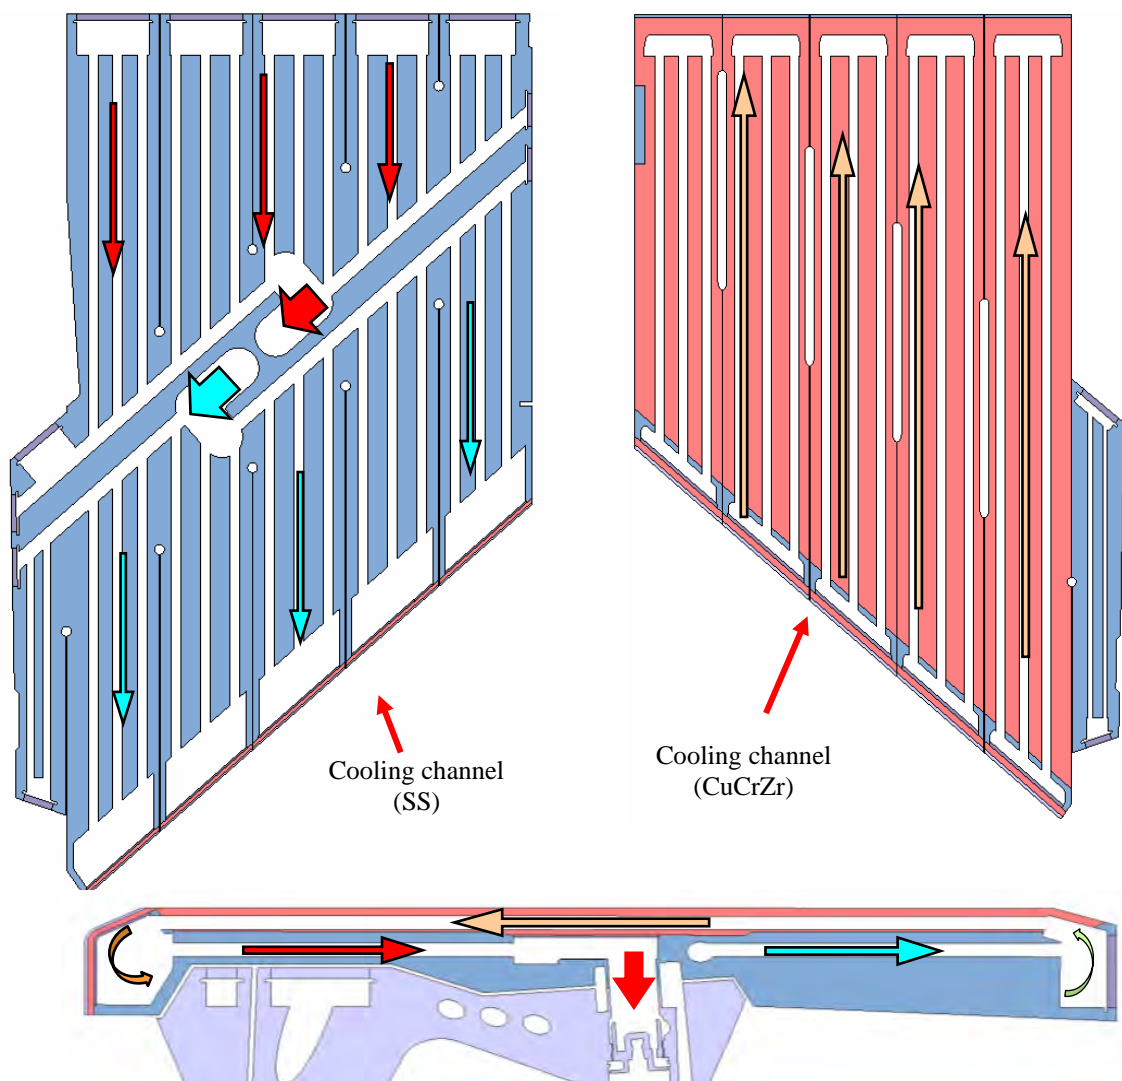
HNB plate 16 Cooling Overview (Deep drilling holes).
